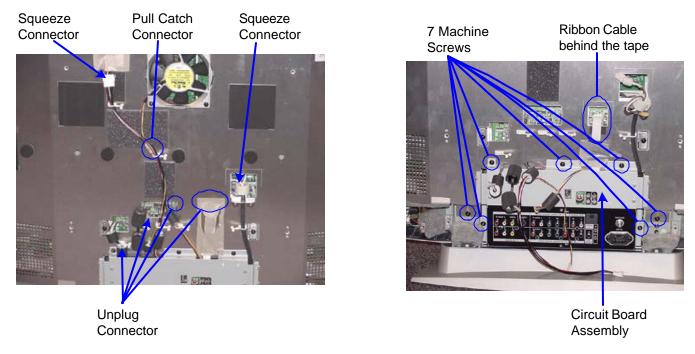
REMOVE 7 CONNECTORS AND 7 SCREWS
